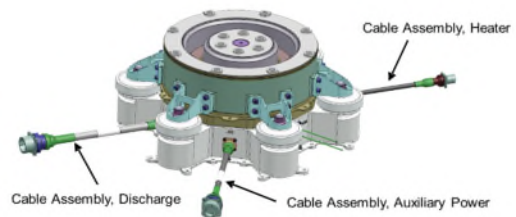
Engineering Test Unit (ETU) Thruster Design
